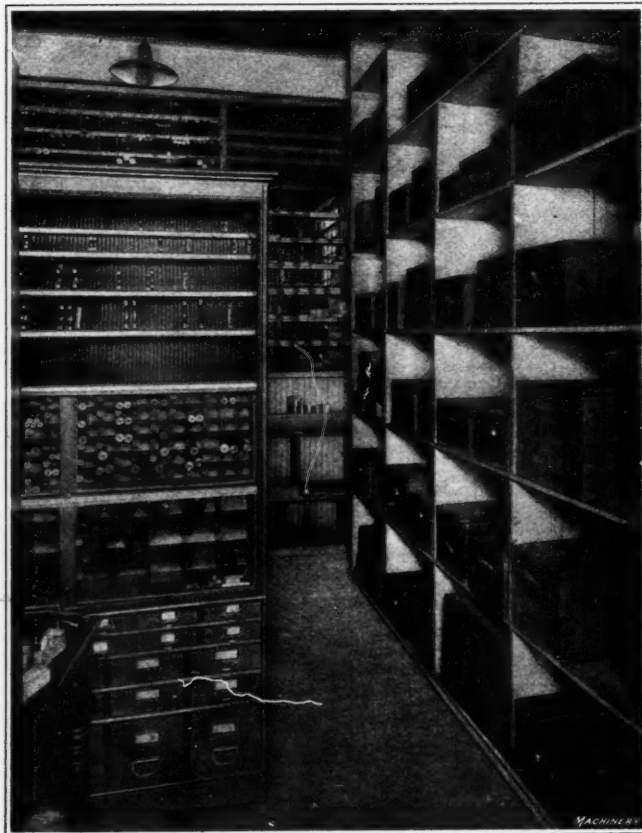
(Right-hand Section) Storage for Boxes in which Sets of Tools are delivered to Manufacturing Department
